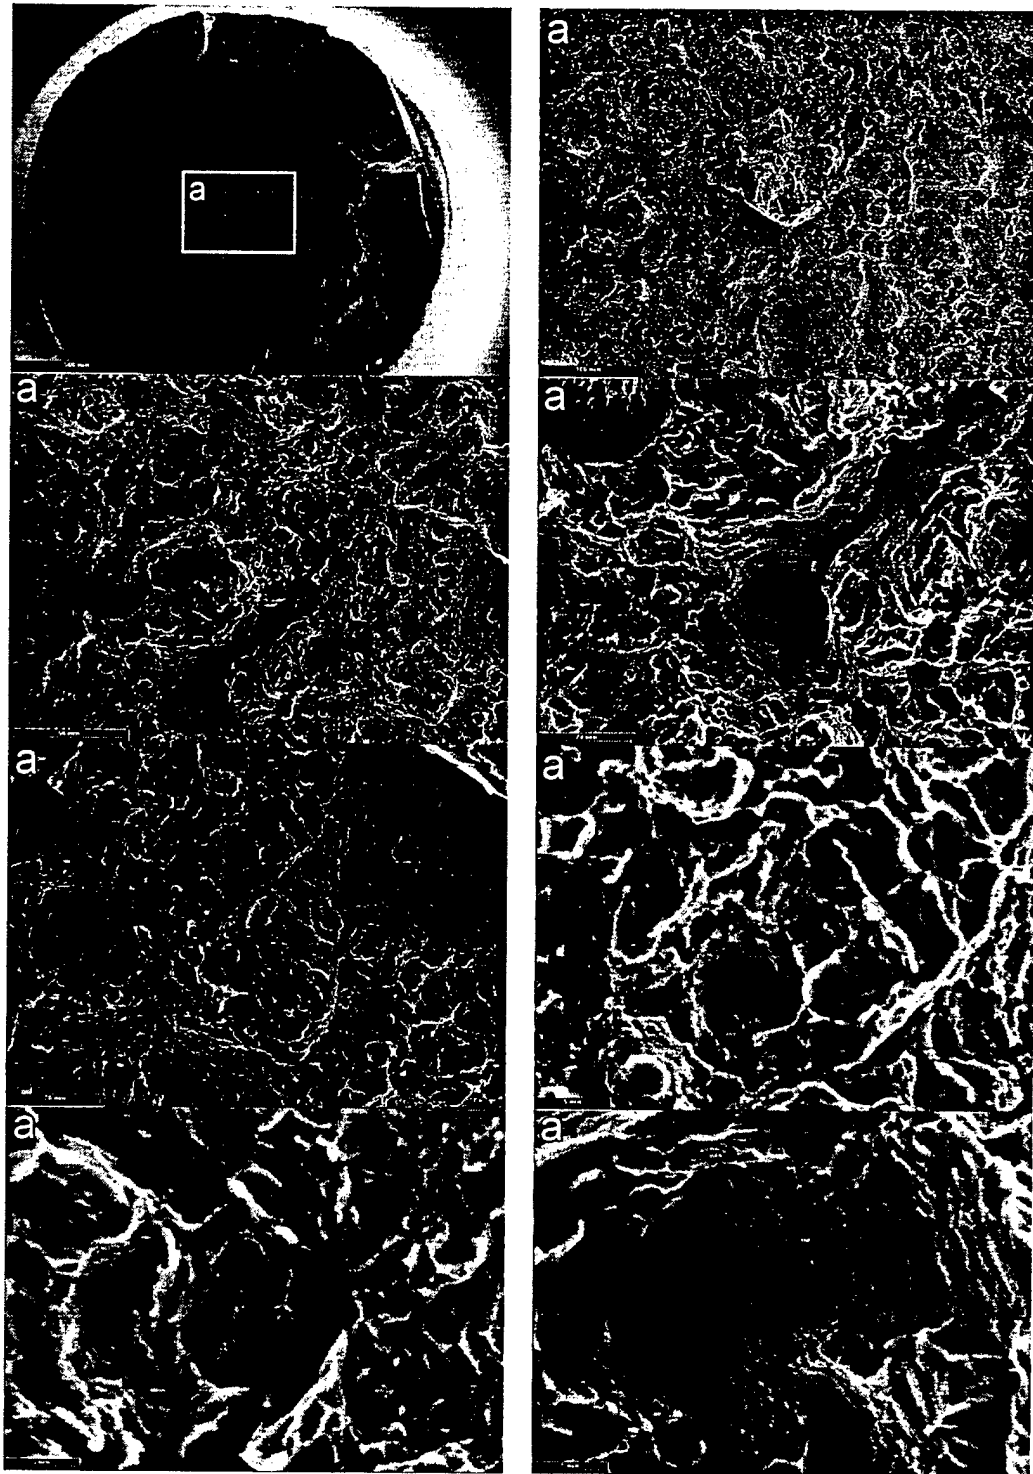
Fracture surface of Ti-15-3 in RR condition #12 (table 10, aging at 300°C, 8h + 450°C, 16h).
